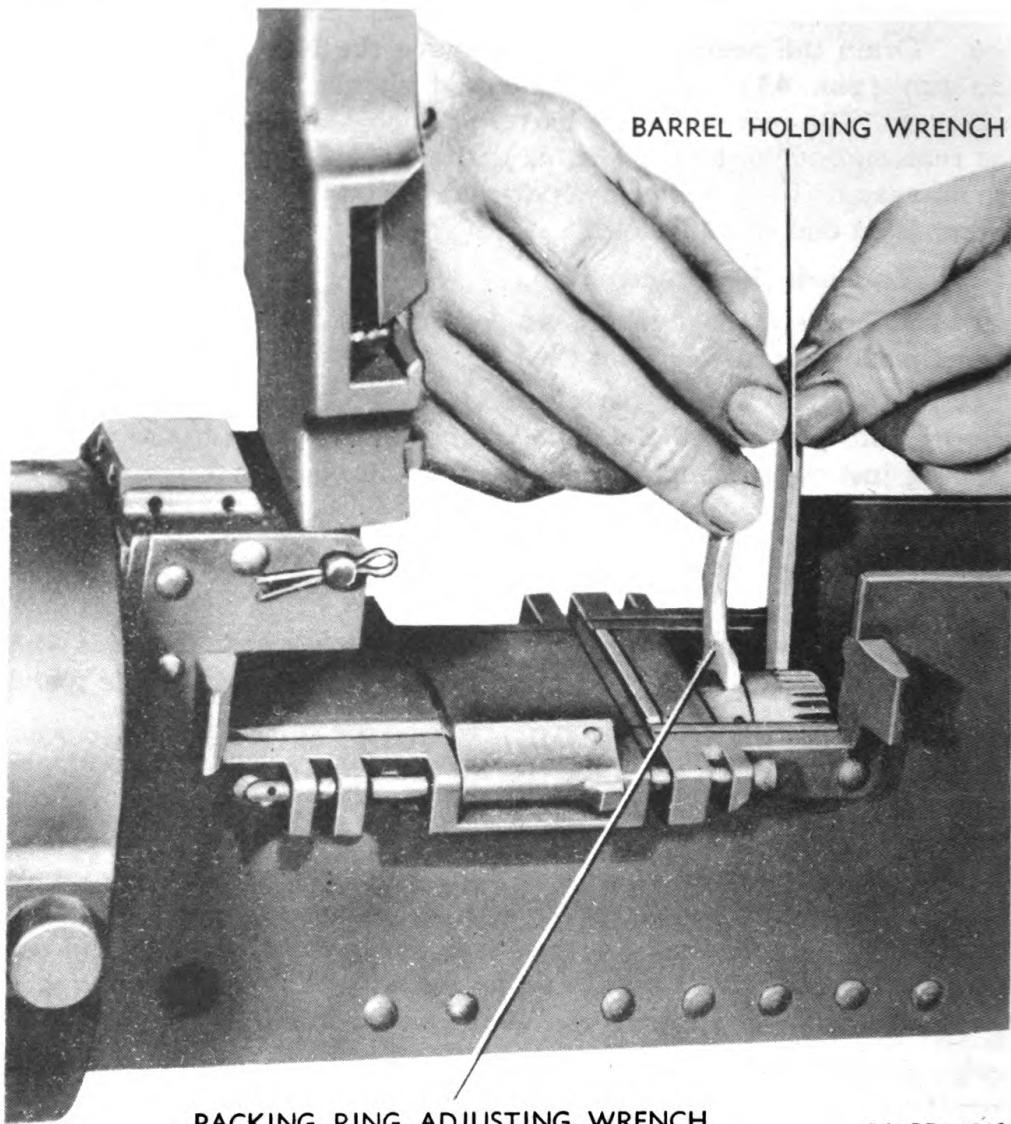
Adjusting Rear Barrel Packing with Special Wrenches
